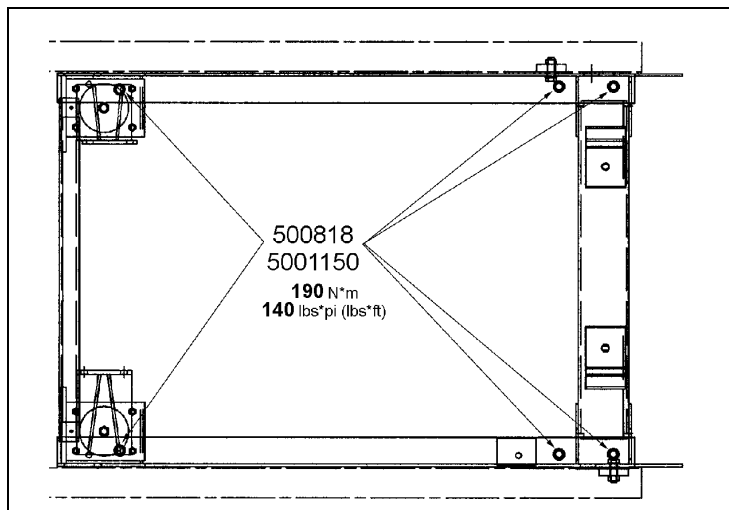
ENGINE CRADLE VERTICAL BOLTS LOCATION
